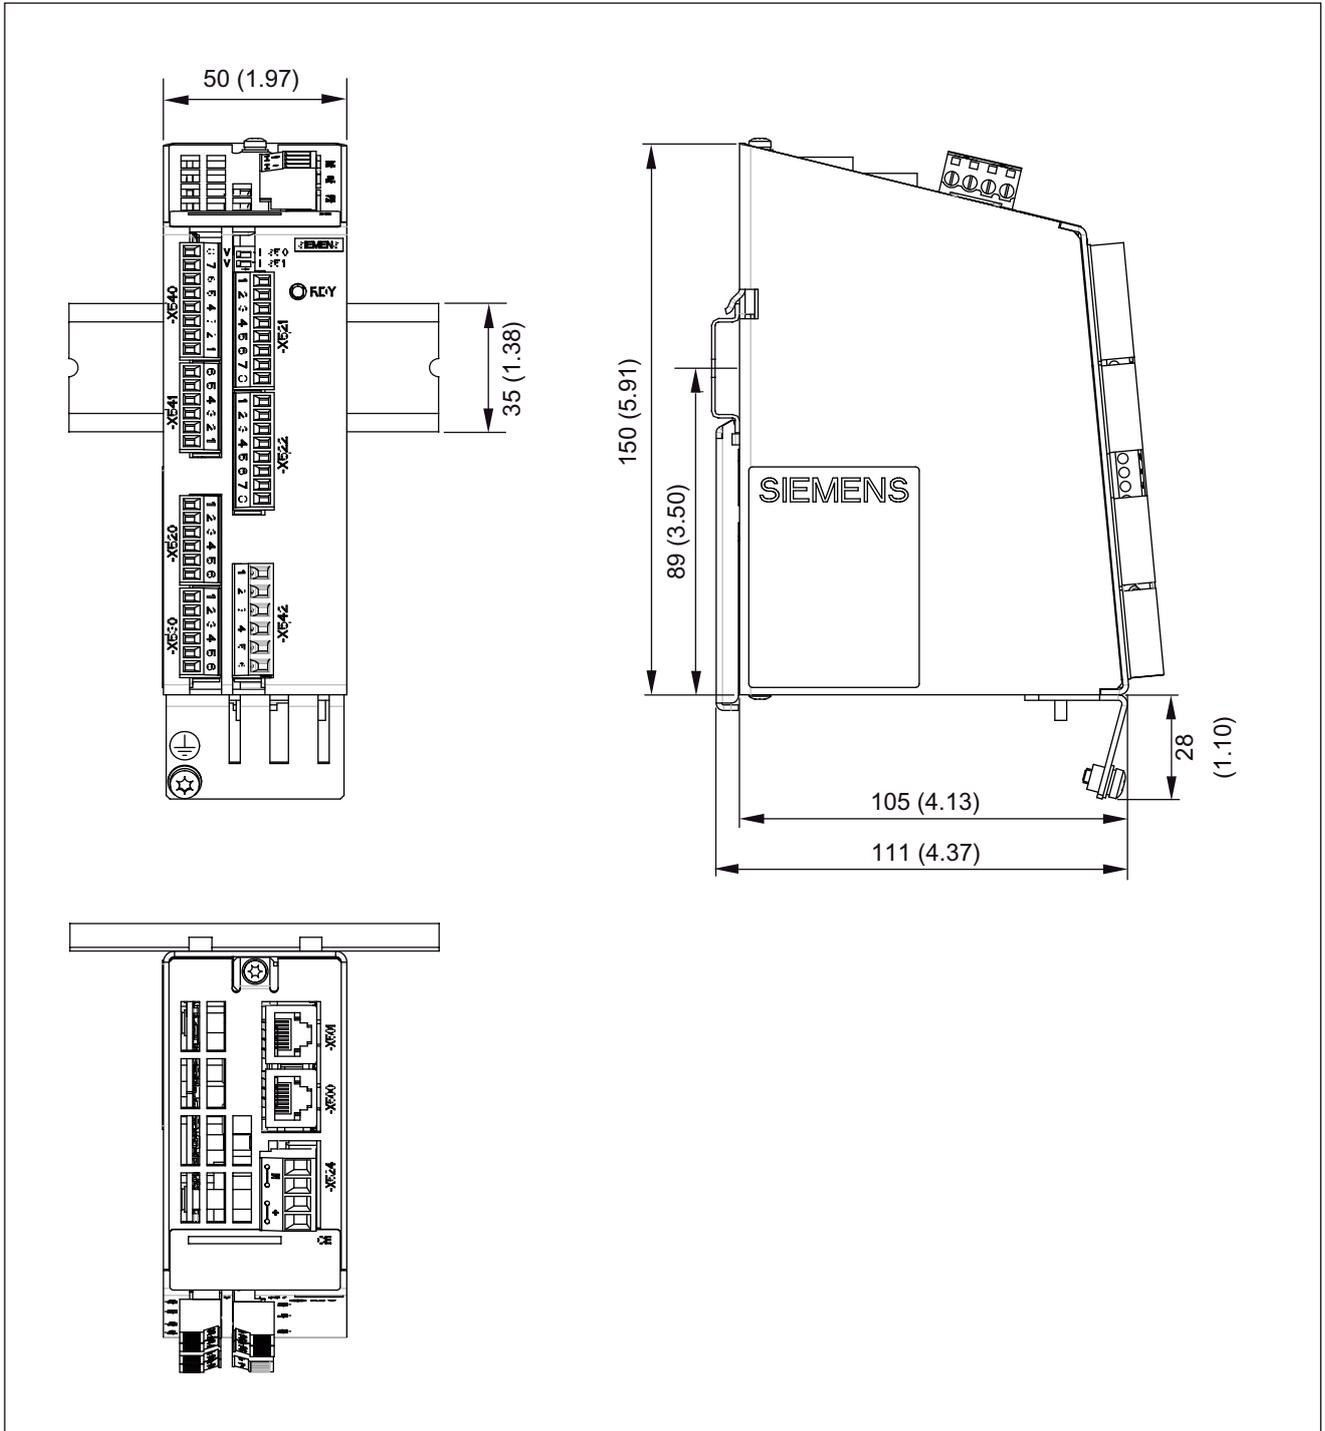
Dimension drawing TM31, order number: 6SL3055-0AA00-3AA1
